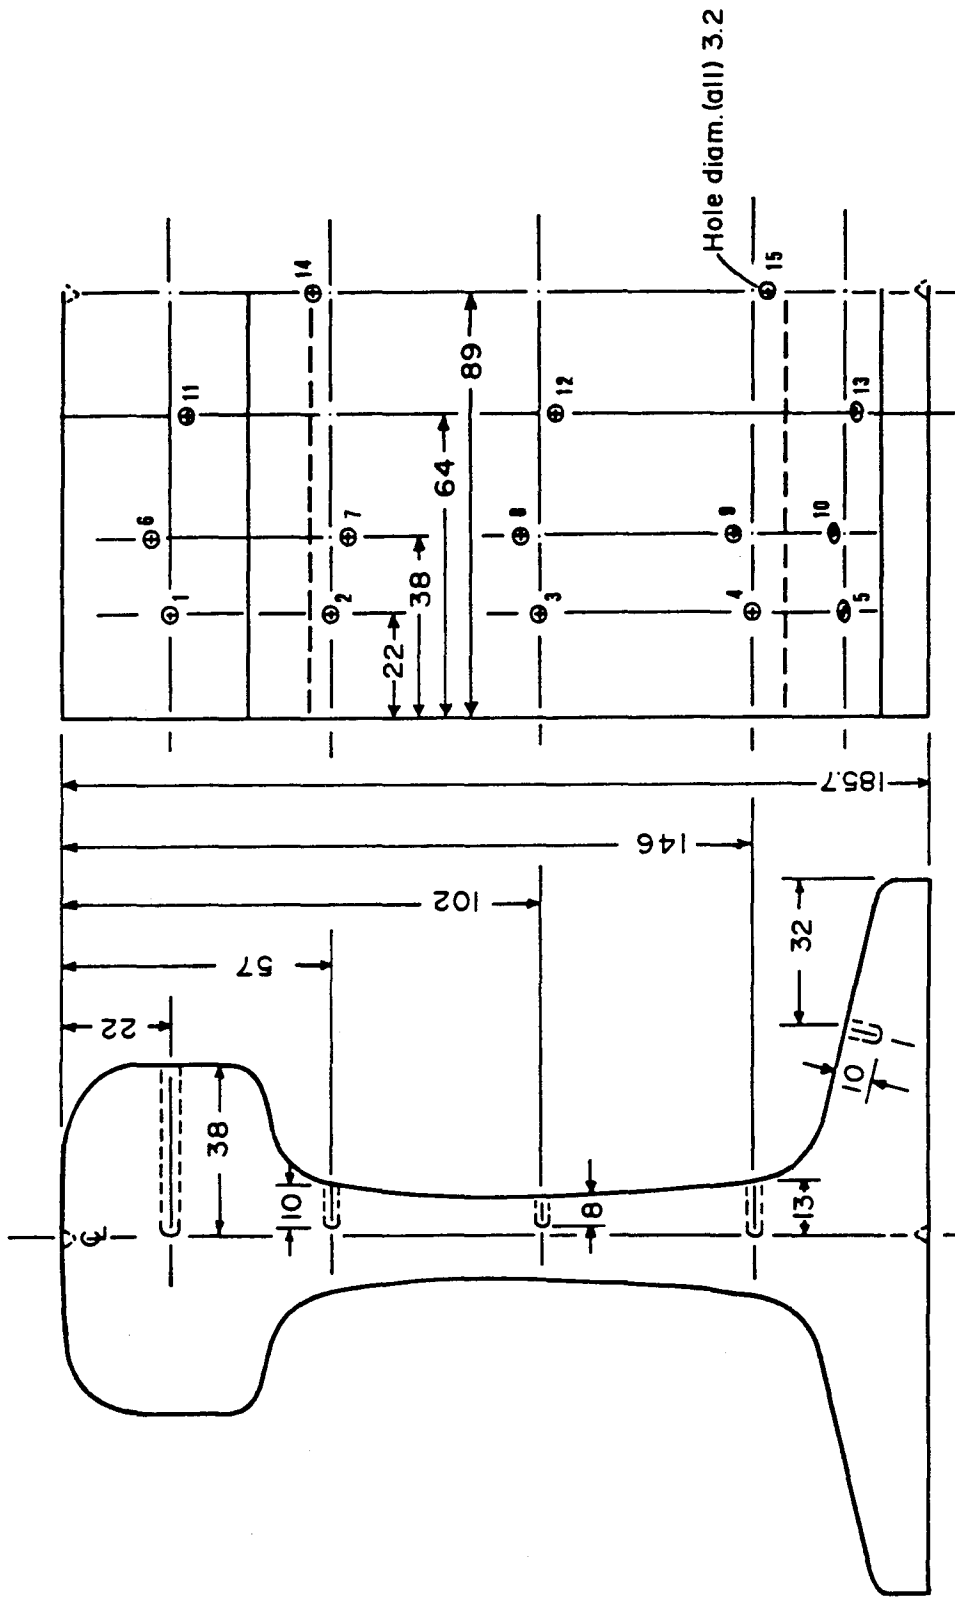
THERMOCOUPLE LOCATIONS FOR WELDS 1, 2 and 4. FOR WELD 3, ALL THERMOCOUPLES WERE 3 mm CLOSER TO THE RAIL END. NUMBERS IDENTIFY THE THERMOCOUPLES AND THE DIMENSIONS ARE IN mm. THE RAIL IS 68 kg/m (136 lb/yd RE).
